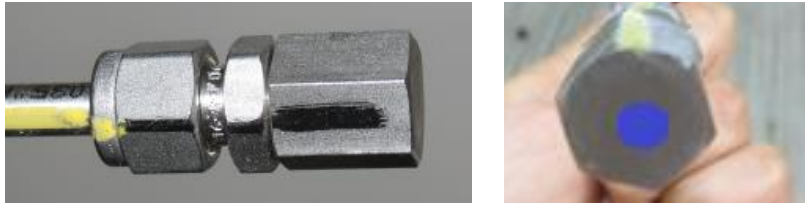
Left: Pin receiver and pin cap marked with a line. Right: Blue dot indicates the trigger line has been inspected and is suitable for use.
